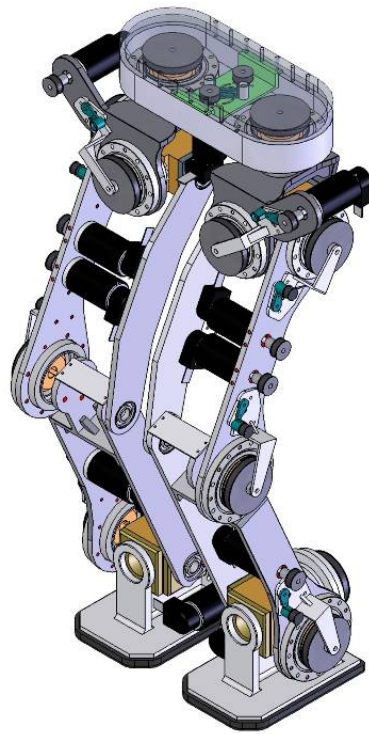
Bipedal walking robot leg module preliminary design isometric view
